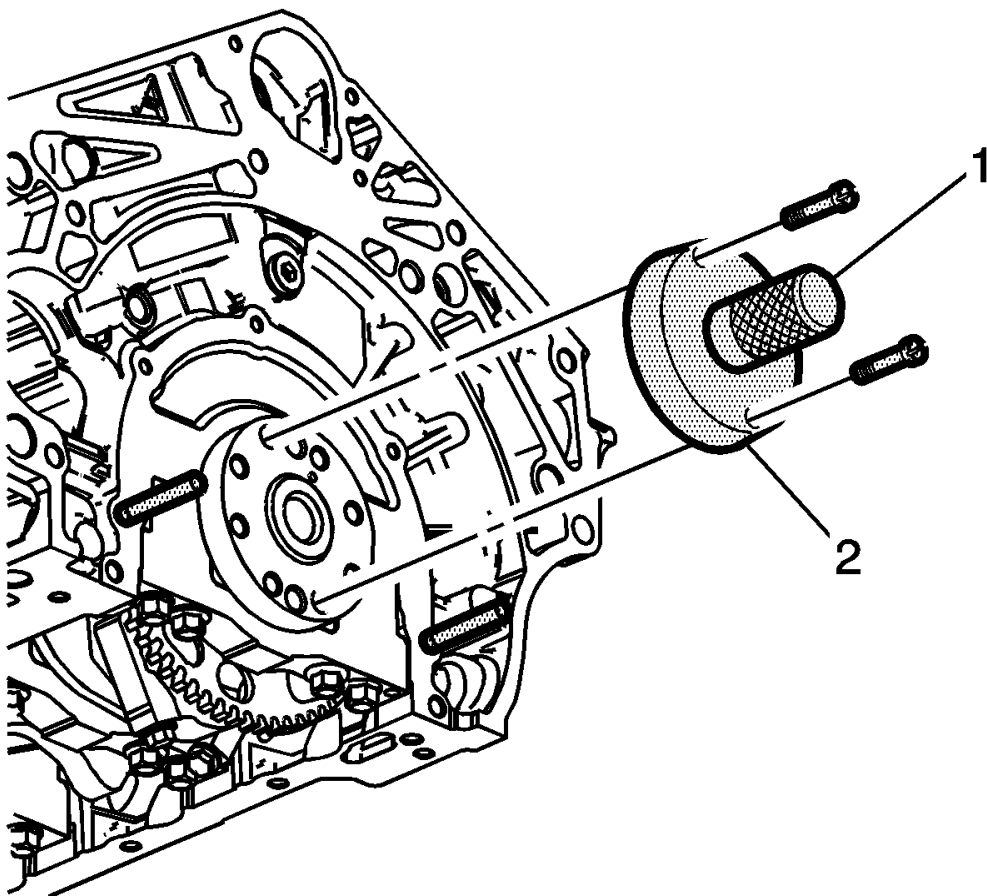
Crankshaft Rear Oil Seal Installation Tool & Handle
